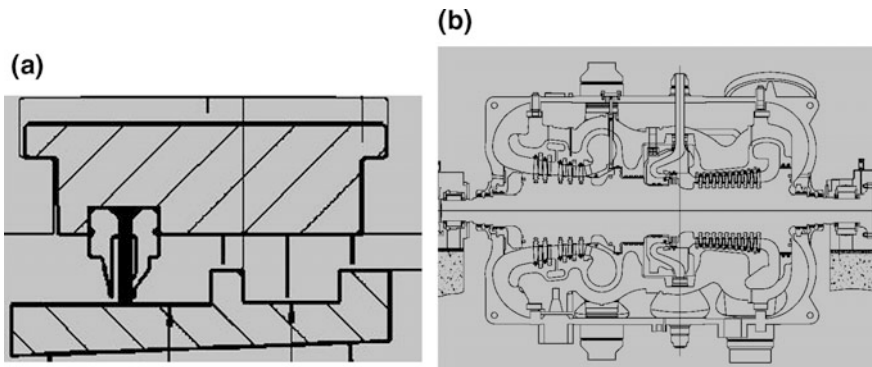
Brush seals installed on rotating row shrouds of a HP turbine blade path
